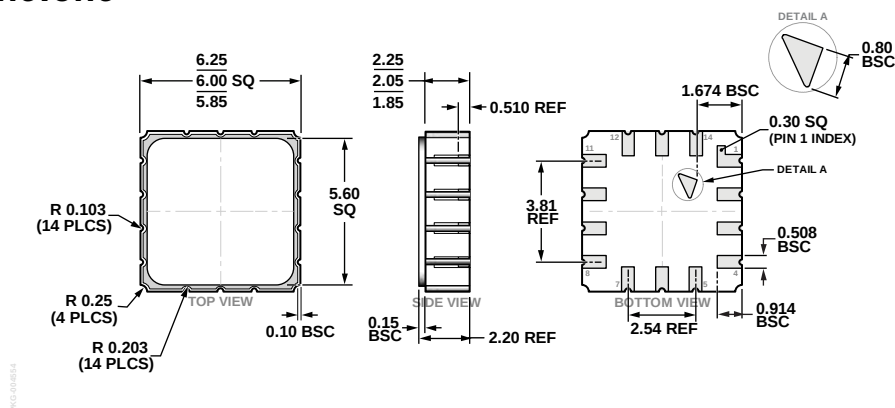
14-Terminal Ceramic Leadless Chip Carrier [LCC]
